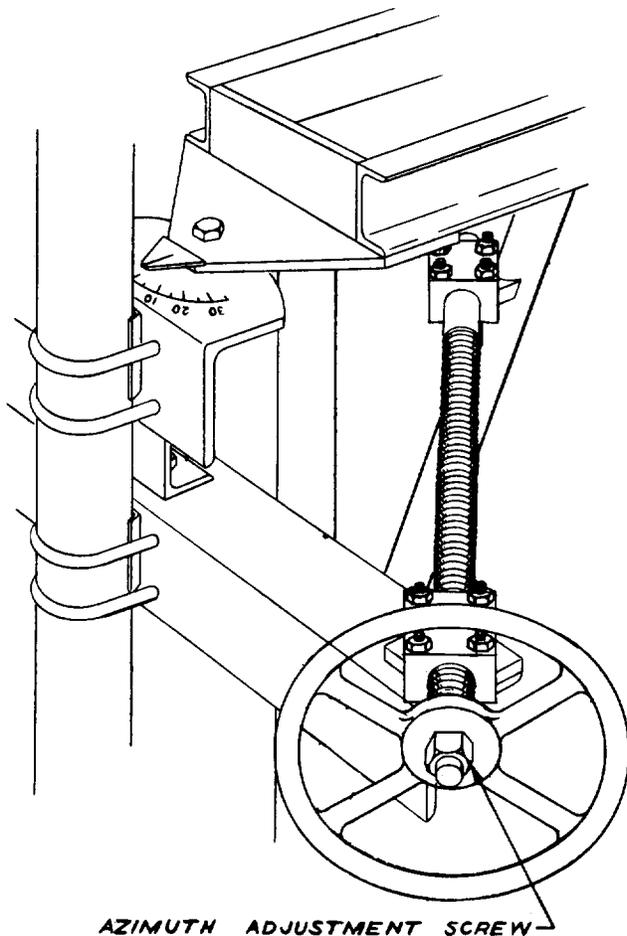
KS-16320, List 8 Azimuth Adjustment Screw Assembly in Operating Position
